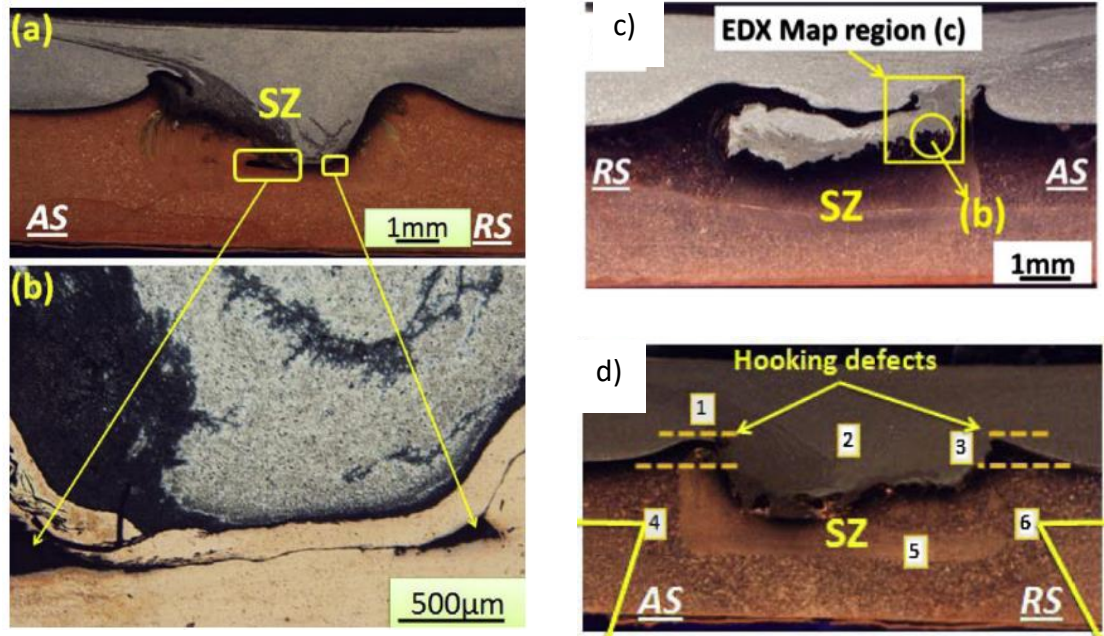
5 Weld using a ω of 600 rpm and v of 32 mm/min, (b) channel formed in weld shown in a, (c) weld using ω of 600 rpm and v of 15mm/min, (d) weld using ω of 825 rpm and v of 32 mm/min [73].
